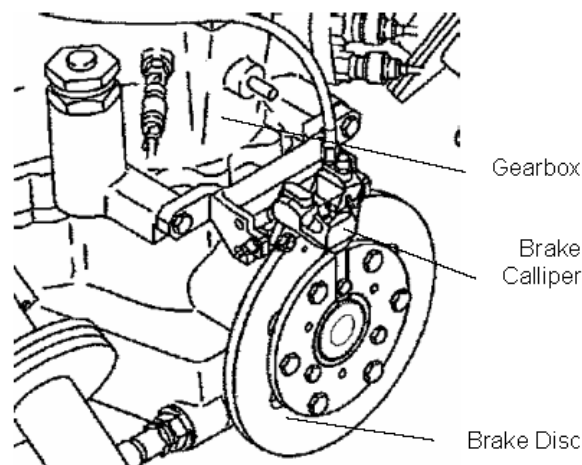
Connection of Brake Disc and Calliper on the Main Gearbox of the Helicopter EC135
